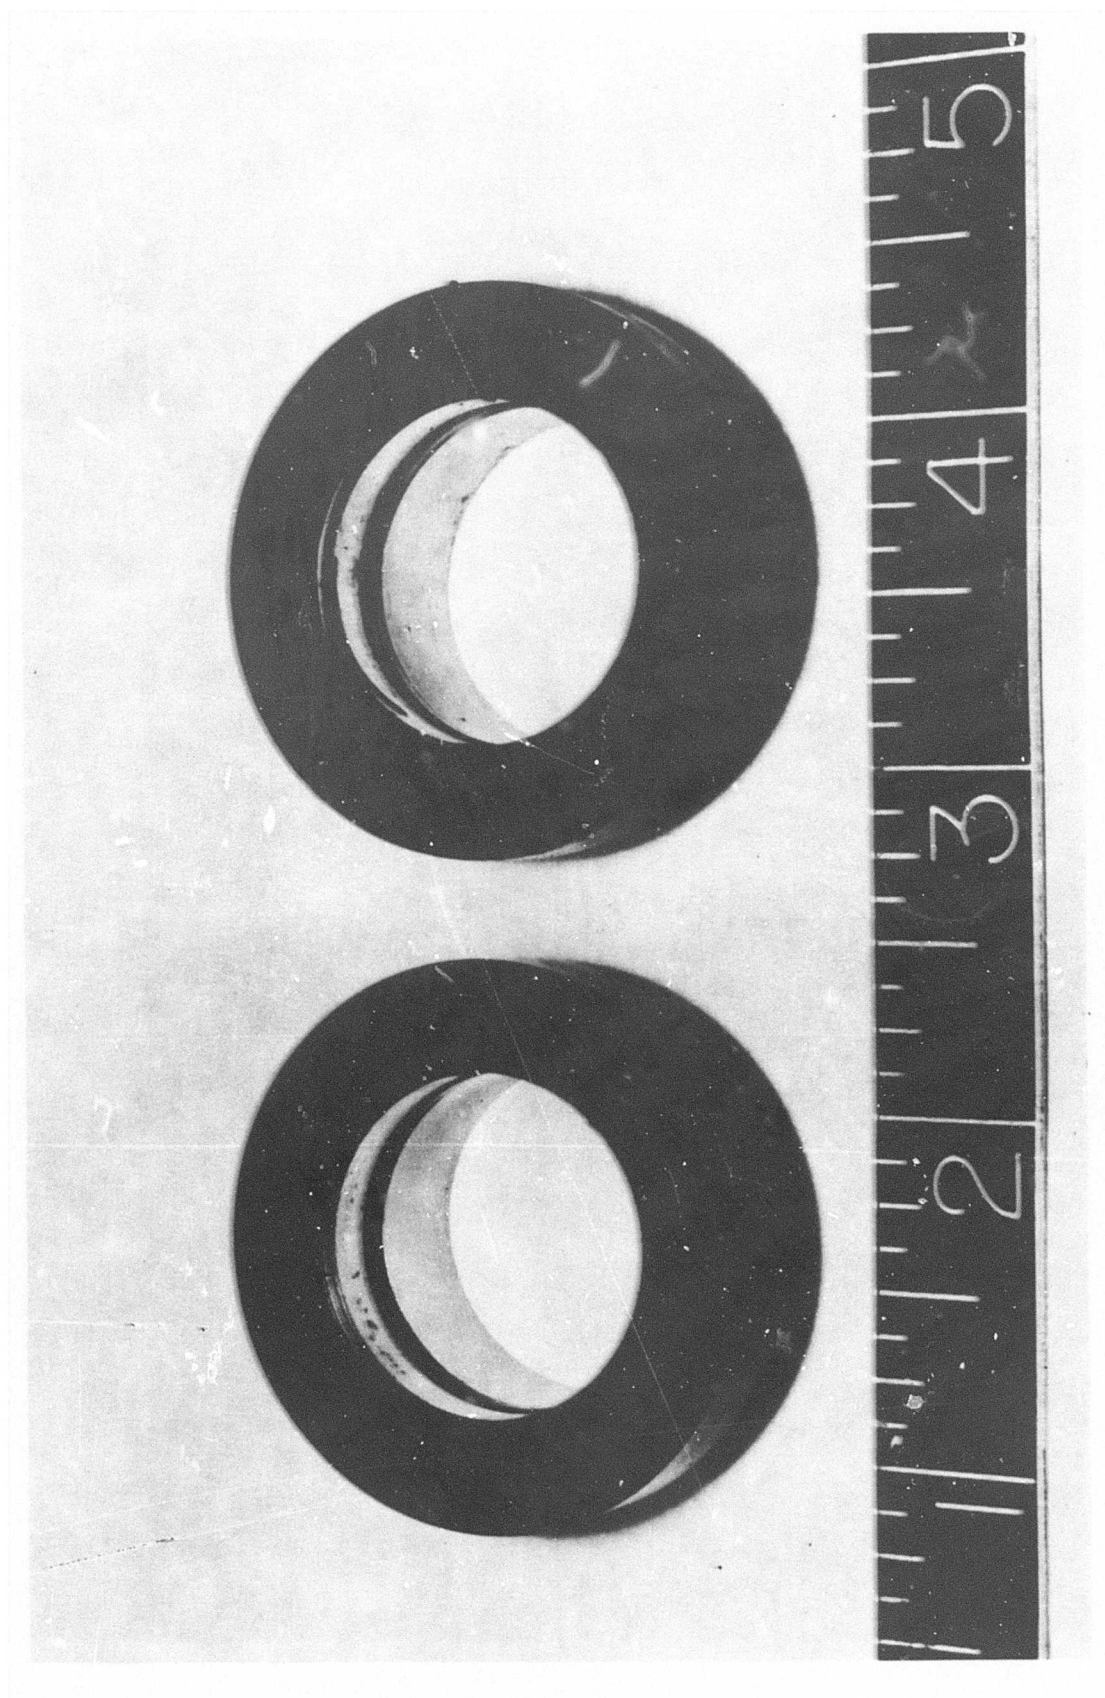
Flywheel Seal Mating Rings (Relapped Prior to 1339.9 Hr Run)
